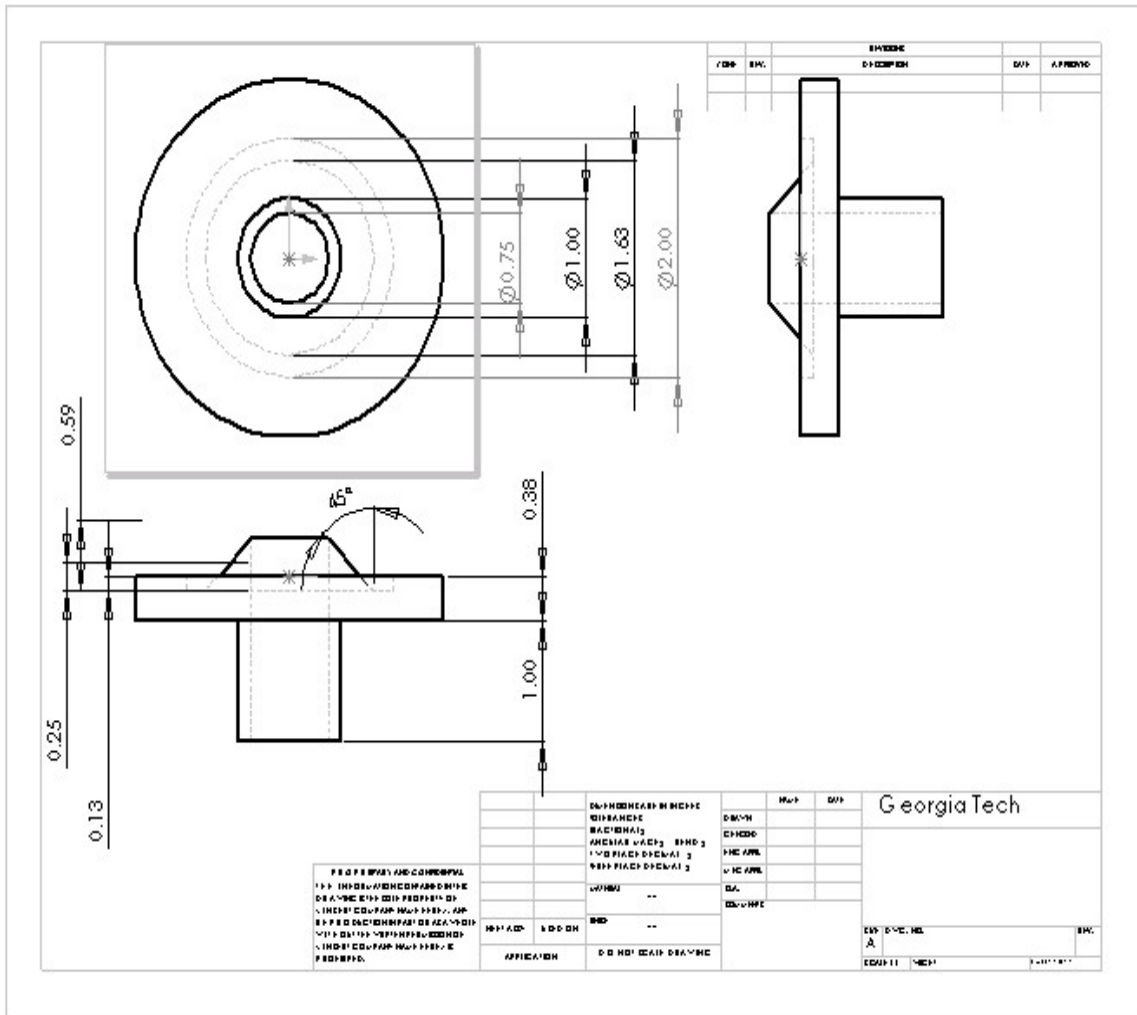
Drawing shows outlet component of the aortic valve holder. All dimensions are in inches.
